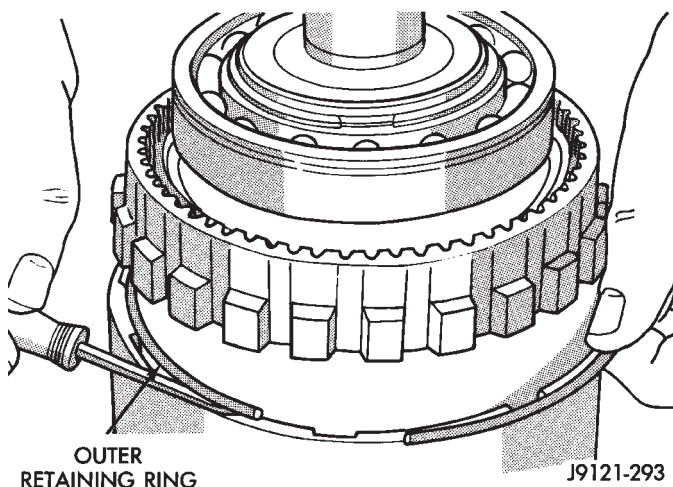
Clutch Drum And Outer Retaining Ring Installation
